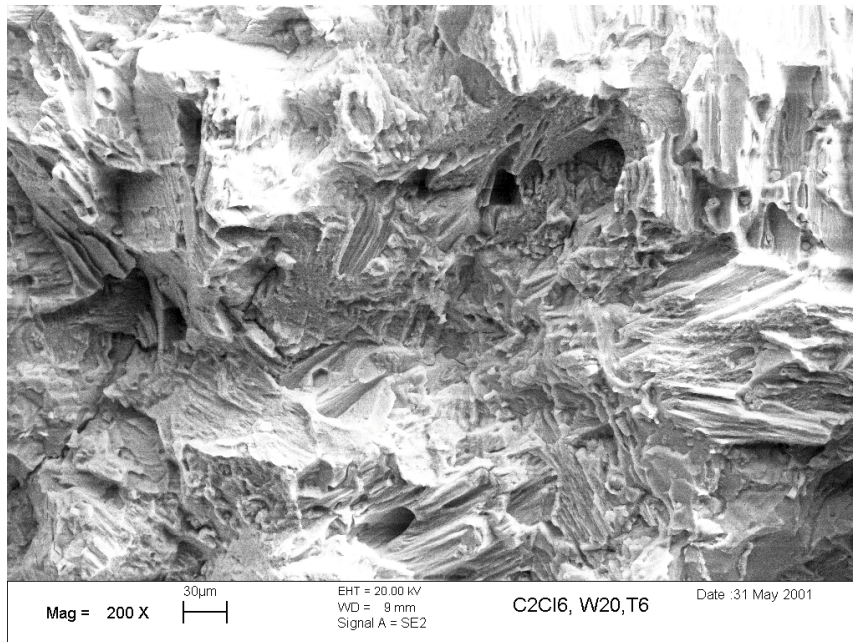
Fracturegraph of the grain-refined sample machined from the 20 mm thick plate, T6 condition.
